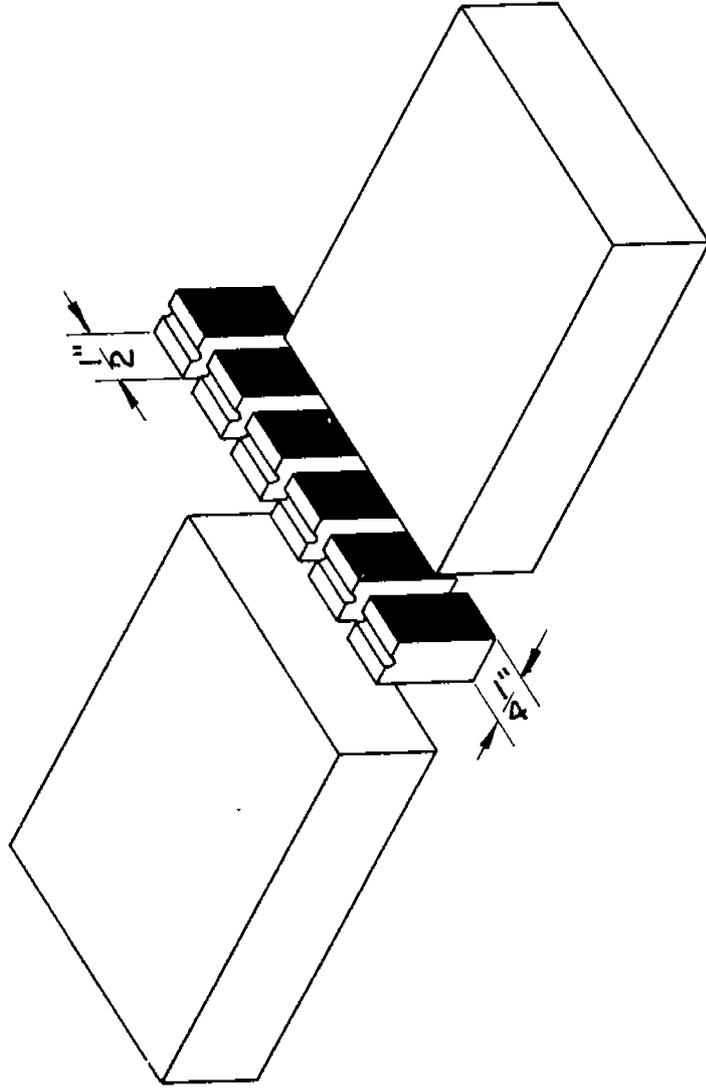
CUTTING AND SECTIONING DETAILS FOR UNWELDED
